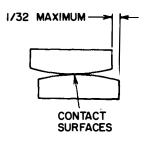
B. Maximum sidewise misalignment of contact surfaces
